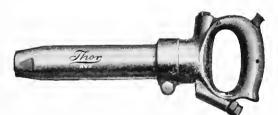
Thor Pneumatic Chipping and Calking Hammer, No. 3. Made in 5 Sizes.
